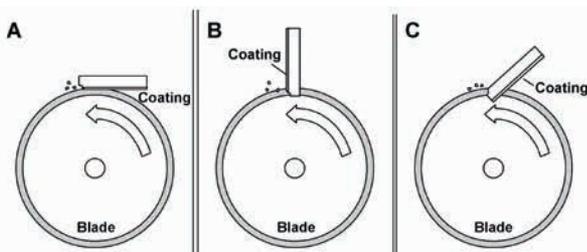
A) Incorrect positioning as the coating is not in compression through the entire contact arc and the sample presents a large contact area to the blade. B) Incorrect specimen positioning because the coating is in tension. C) Correct positioning, coating is in compression and presents small contact area.
